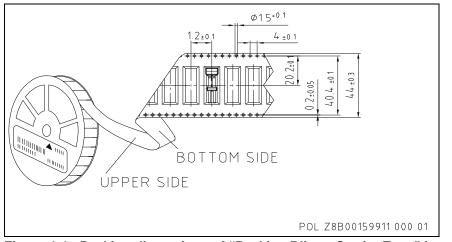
Packing dimensions of "Packing Blister Carrier Tape" in mm of PG-SSOM-2-11
